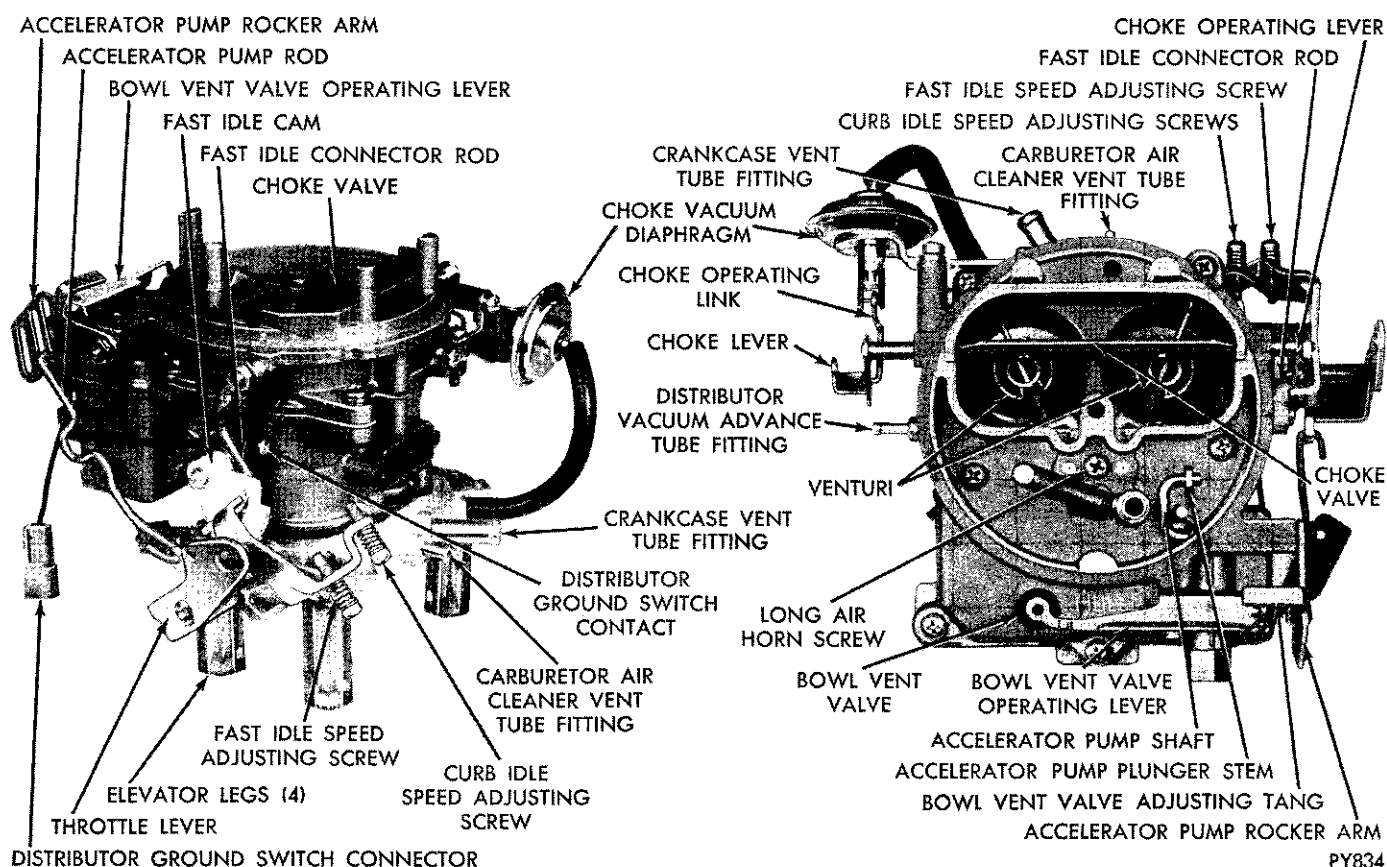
Carburetor Assembly (Holley 2210 Series)
